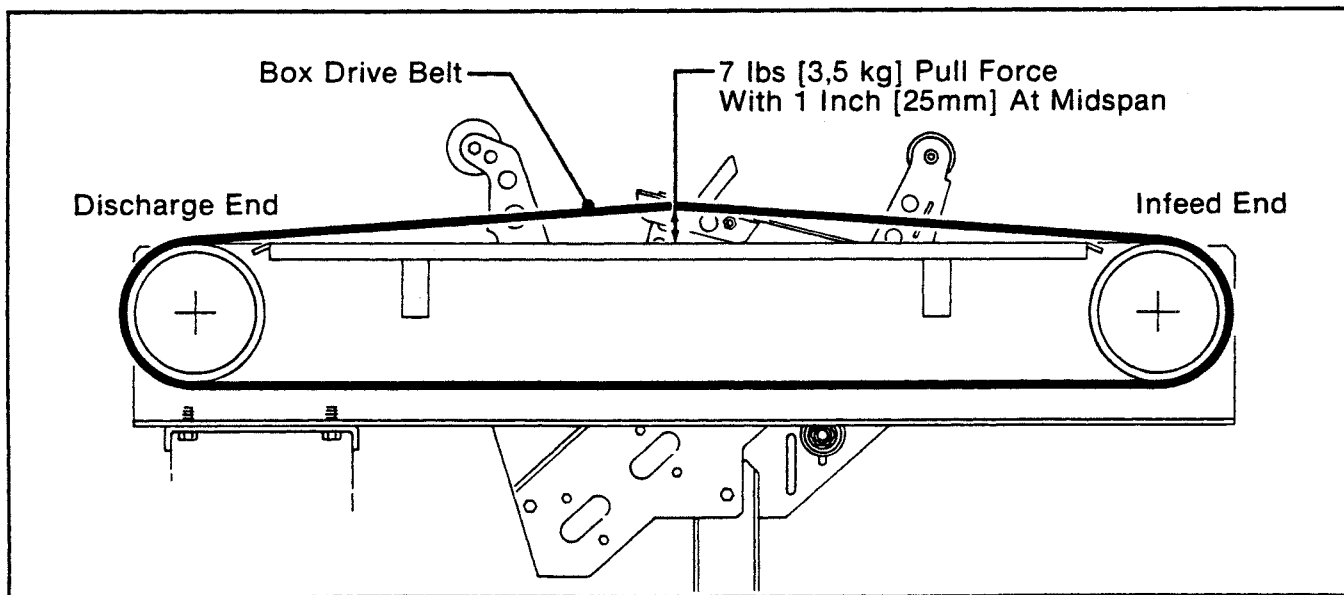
Box Drive Belt Tension Adjustment - Left Side View
